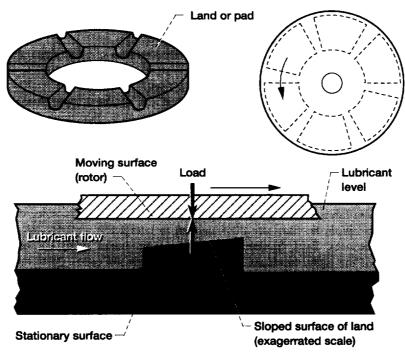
Tilting-pad or tapered-land thrust bearing.
